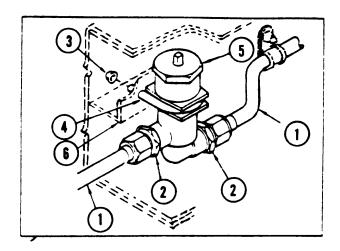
, Trailer Air Cleaner Assembly (ARMY)
